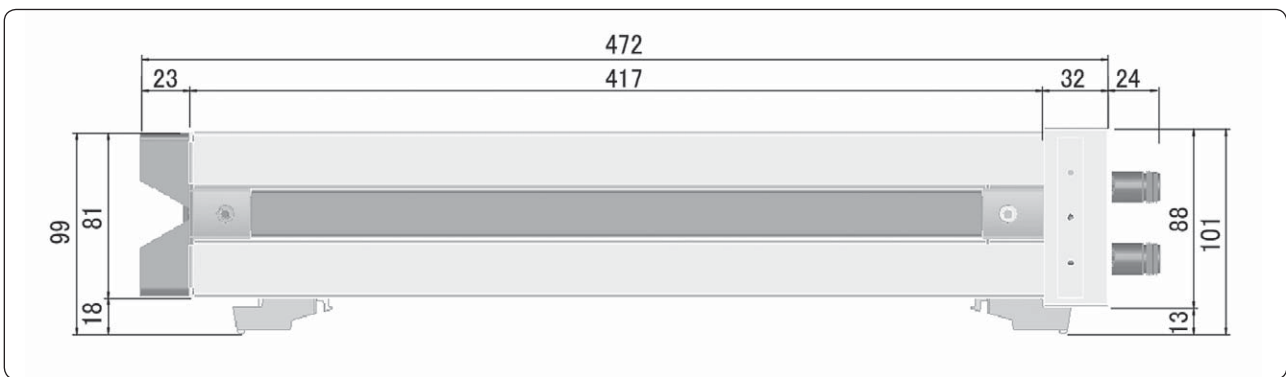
Dimensions (side view, with Option E5091A-009, in millimeters, nominal)
